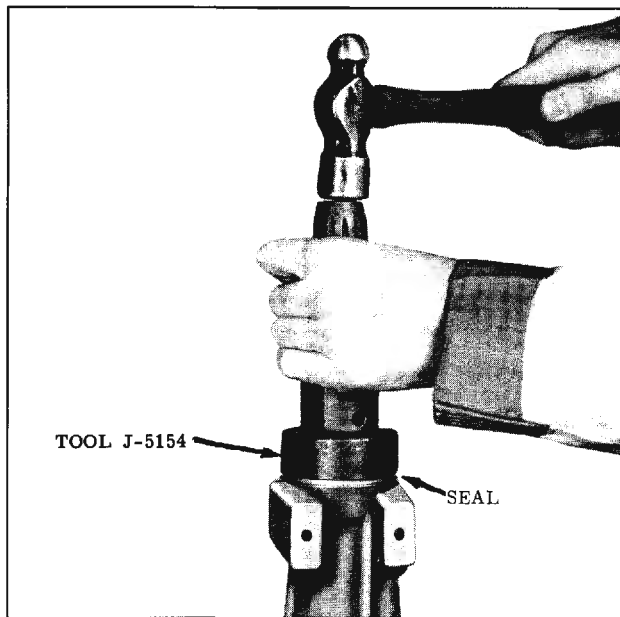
Installing Rear Bearing Retainer Oil Seal
